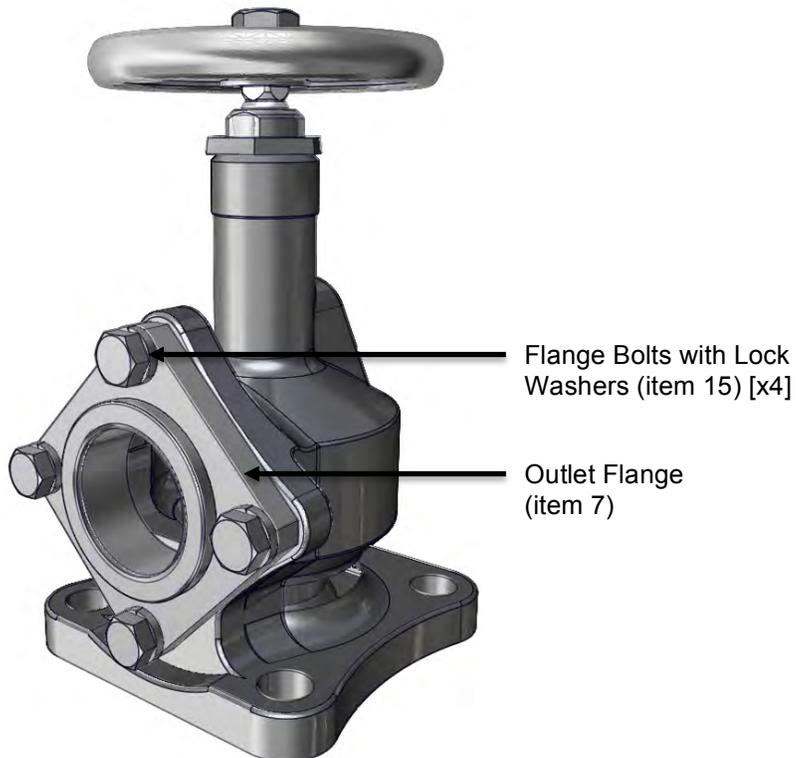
Reassembly Steps 7.2.15 through 7.2.16
